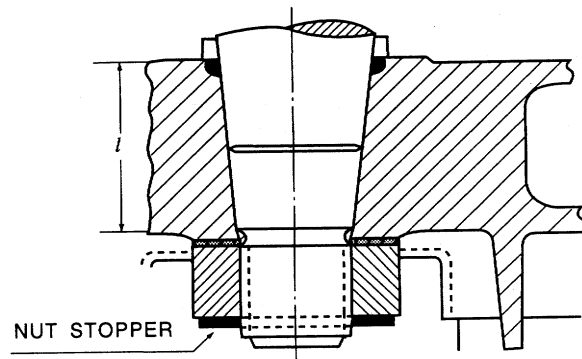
Cone Coupling with Hydraulic Arrangement
